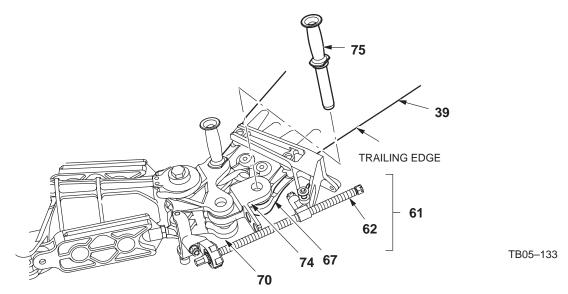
Install of Quick Release Fold Pins in L/H AFT Blade Block, Lead/Lag Link and Blade Root End
